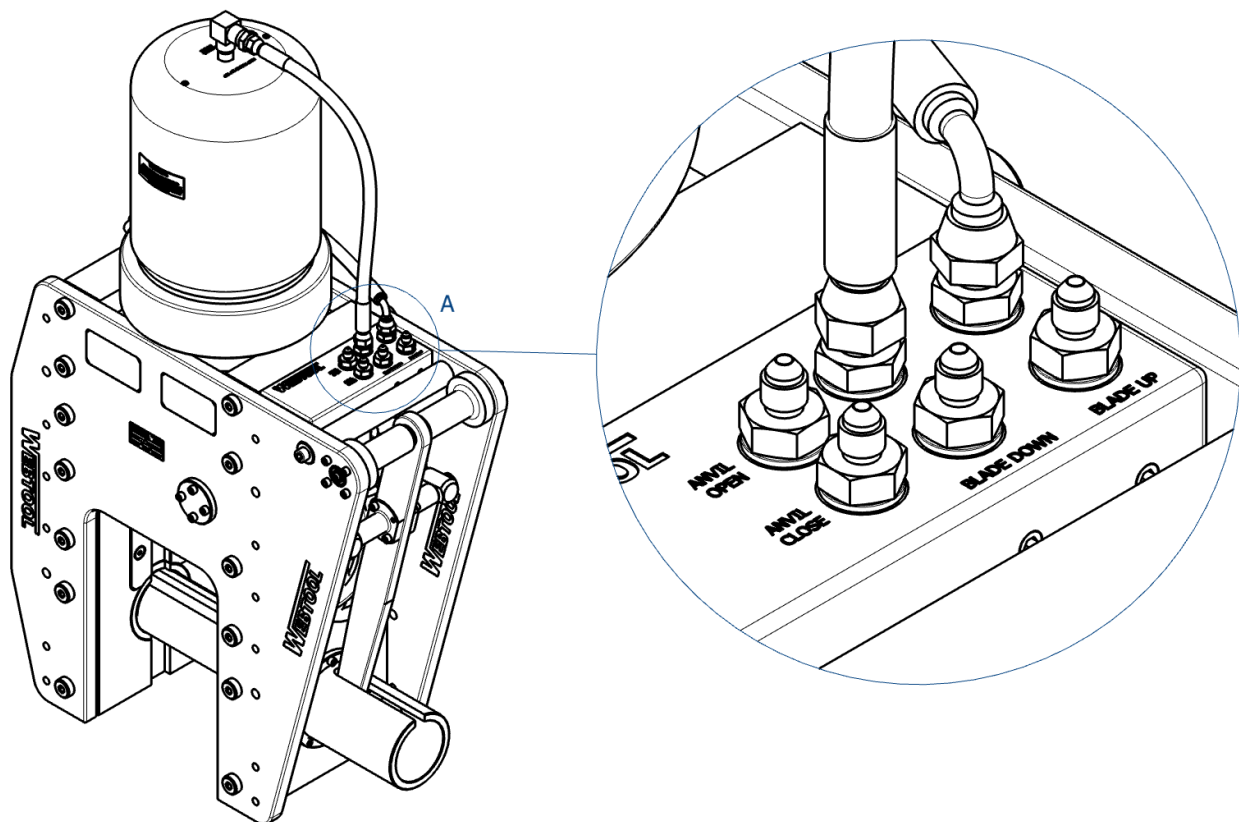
RCV215A manifold block (Lifting frame removed for clarity)
